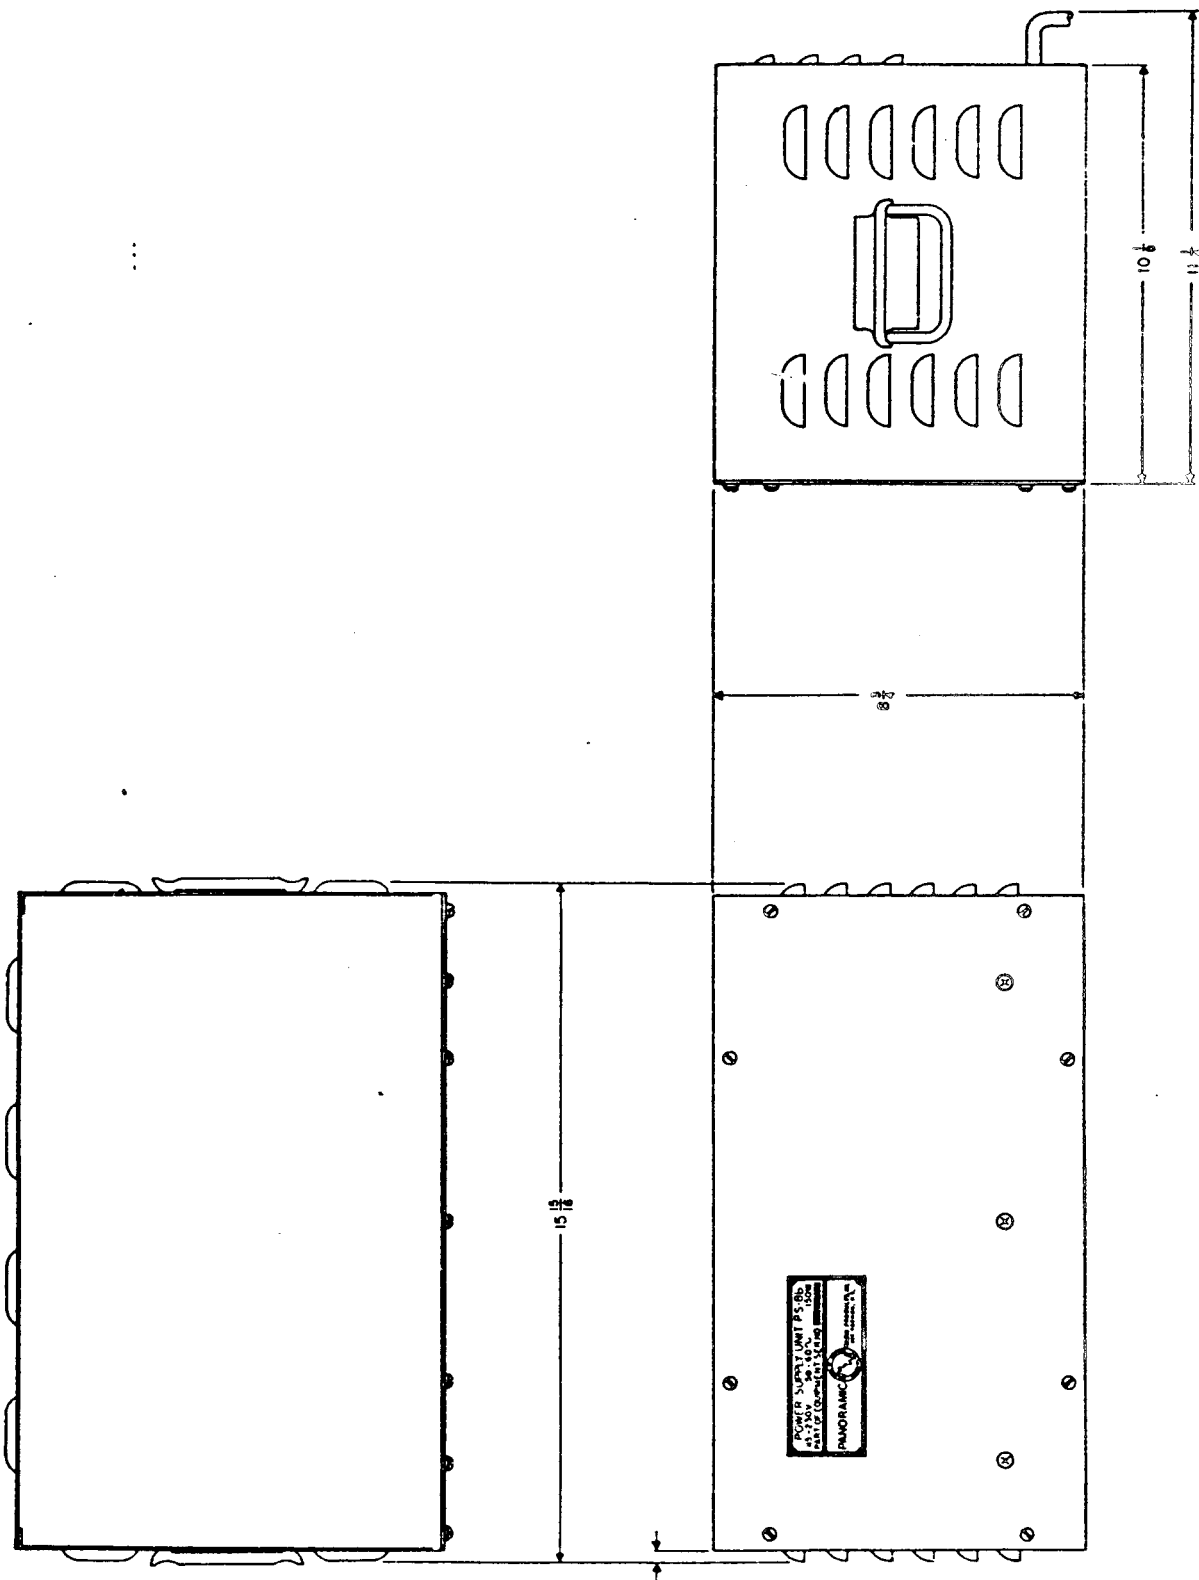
Outline Dimensional Drawing, Model PS-8b, in Cabinet.
